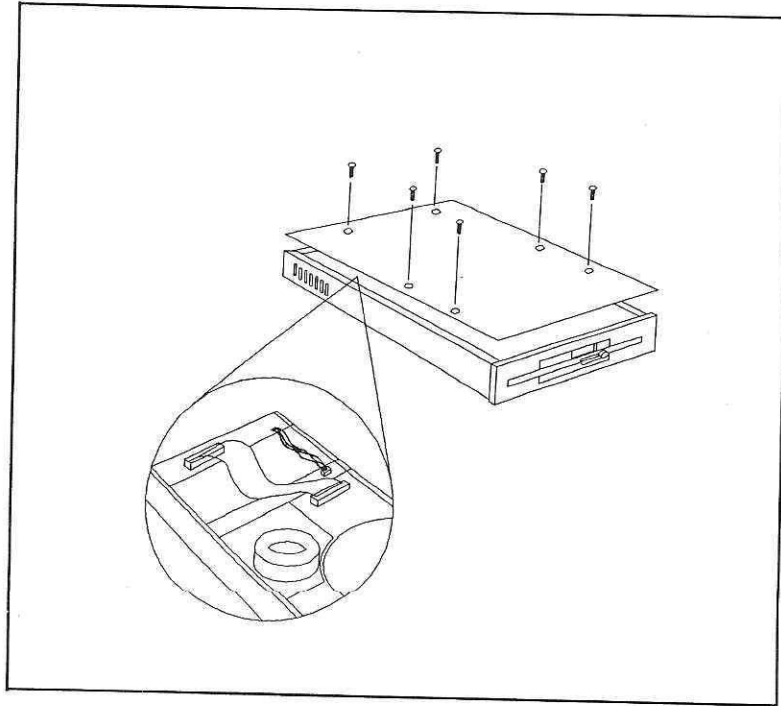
Removing the 5.25-inch Flexible-Disk Drive Chassis Base Plate
